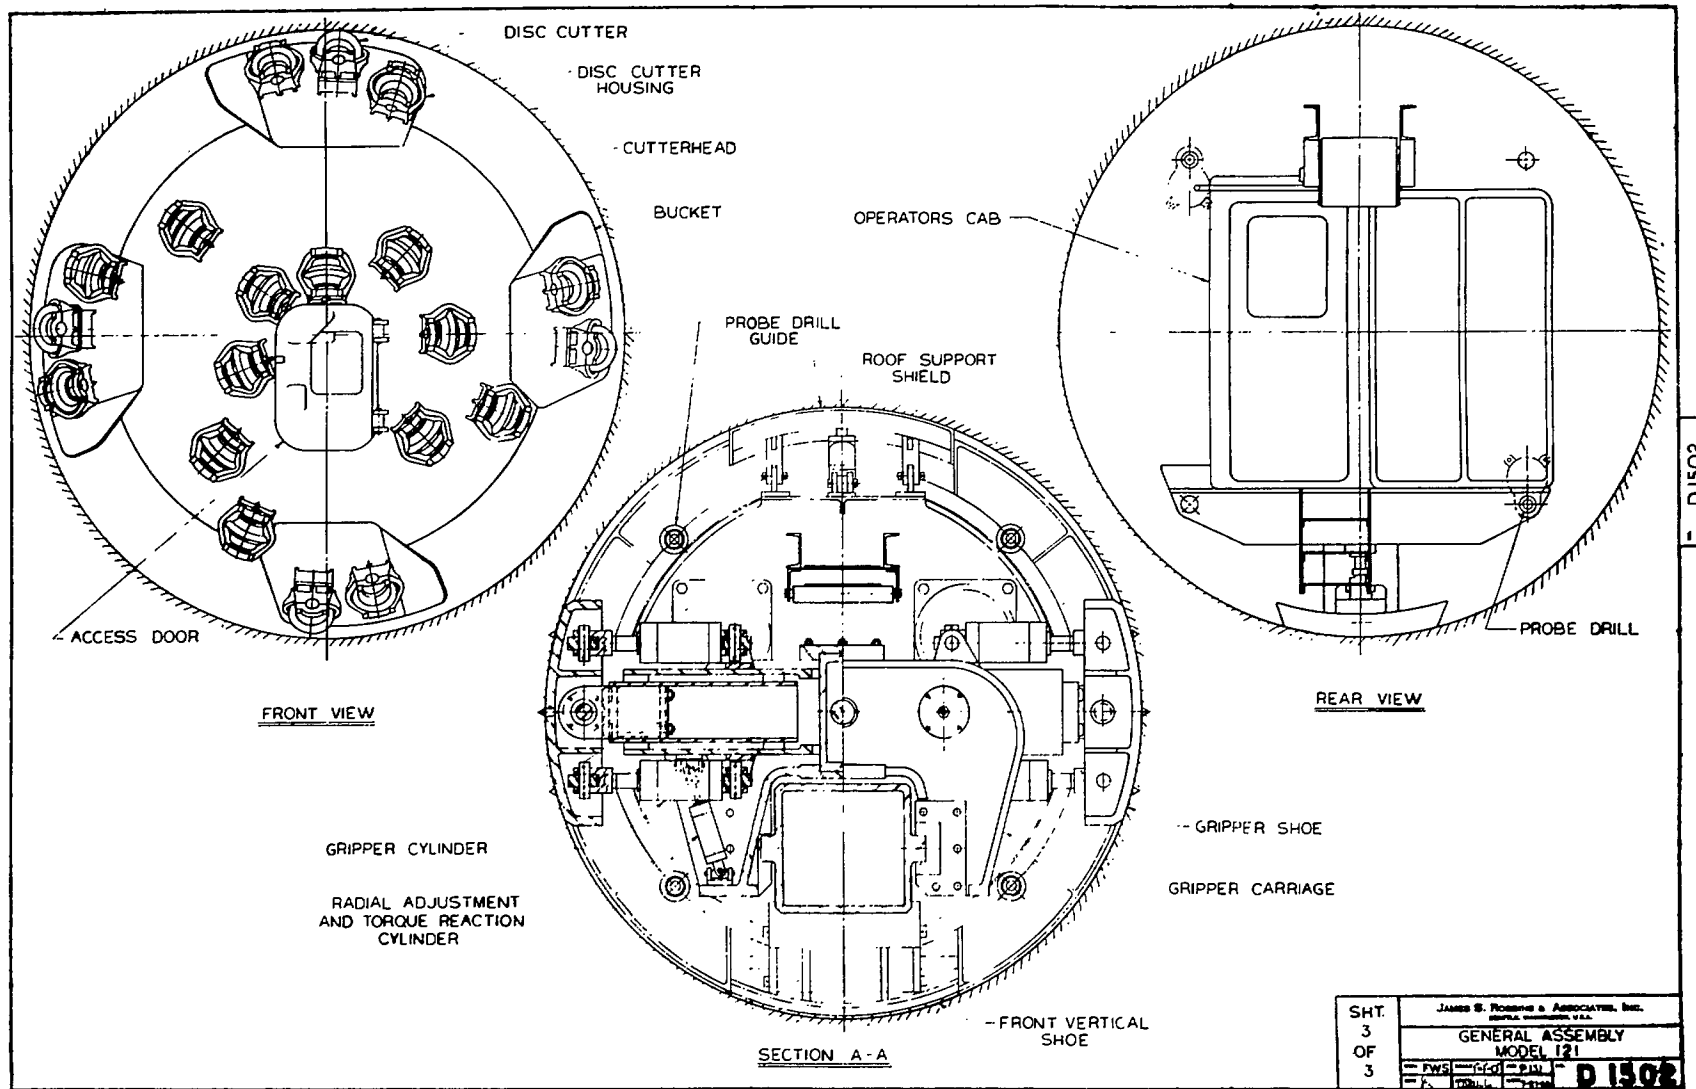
Plan View - Robbins Boring Machine, Model 121.
